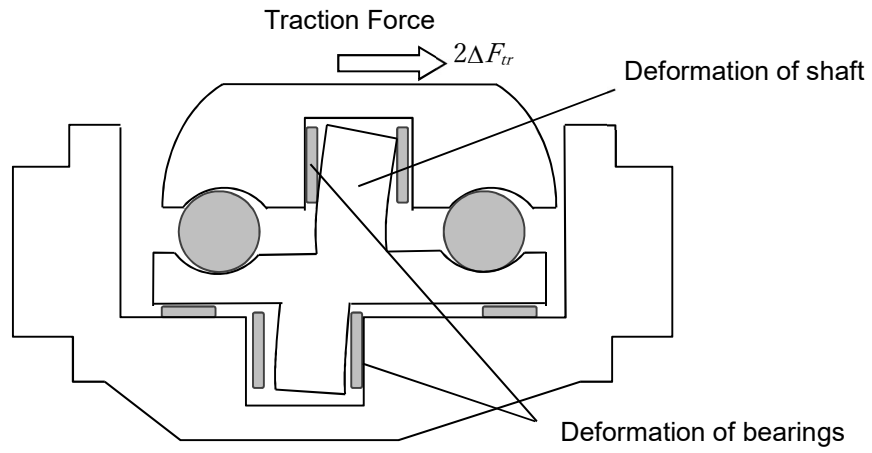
Displacement of power roller due to the deformation of the shaft and bearings.
